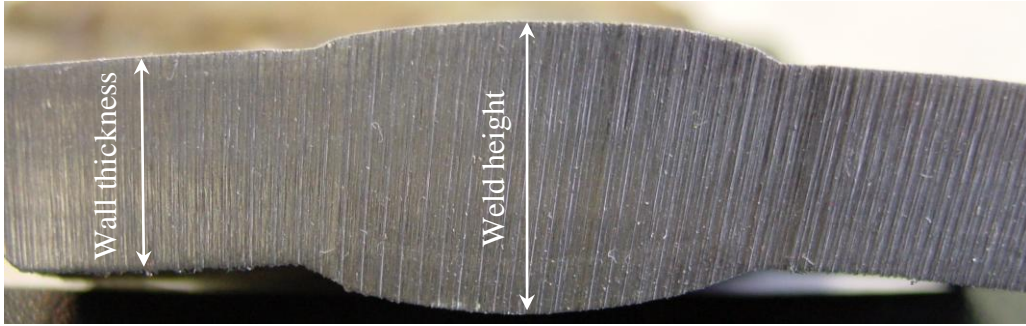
Cross section of pipe wall with seam weld (Specimen LCF16N1)
